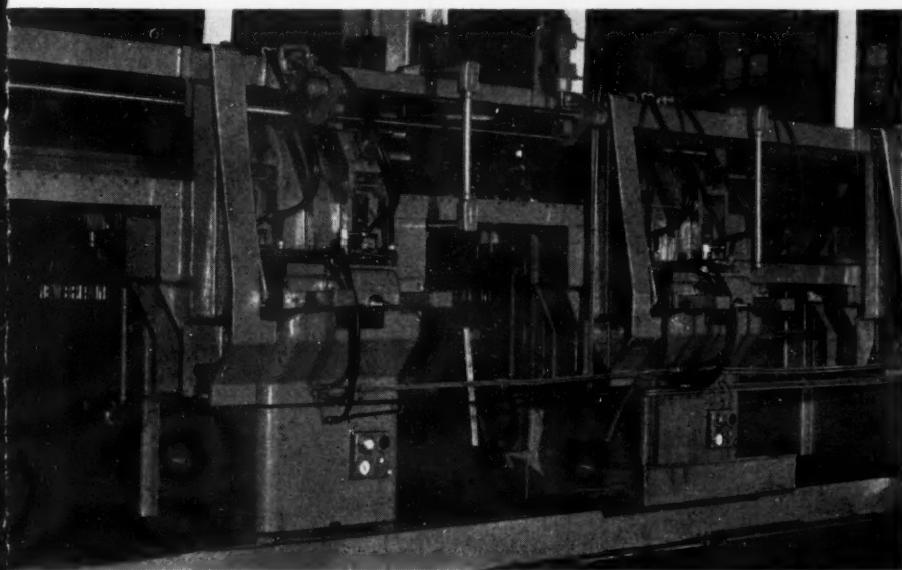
Valve stem holes in guides and valve seats in inserts are machined, after assembling to the cylinder head, in this transfer machine.
